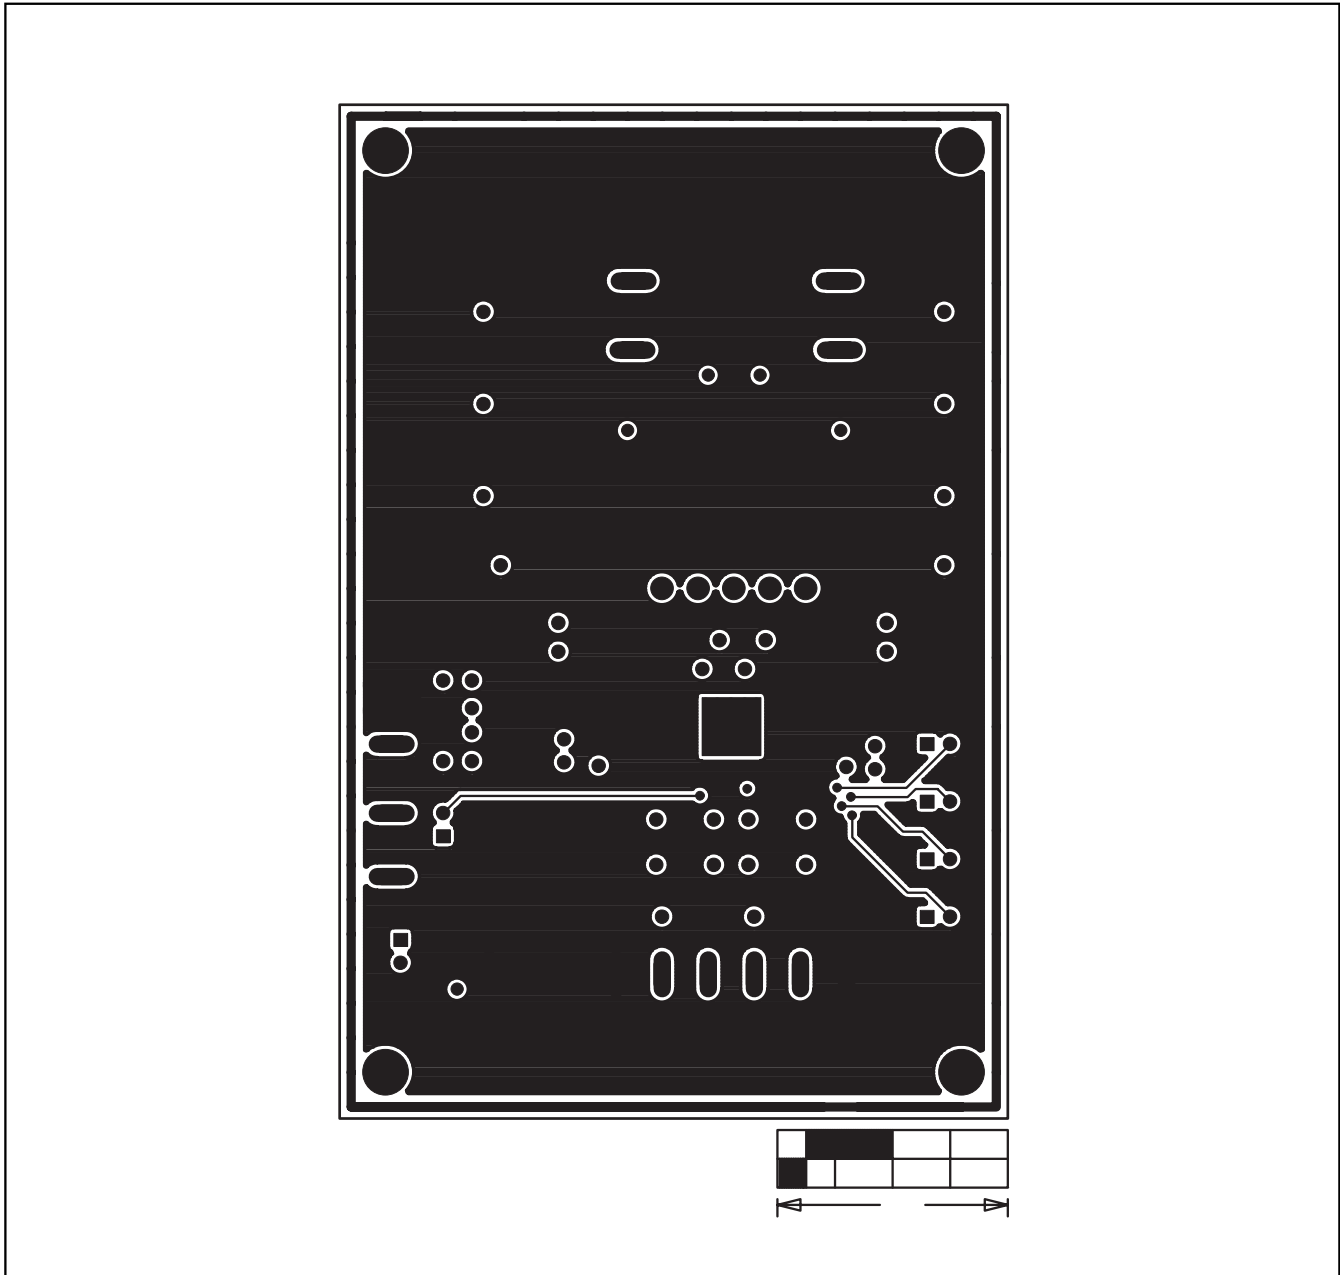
MAX9741 EV Kit PC Board Layout—Layer 2 (GND)
